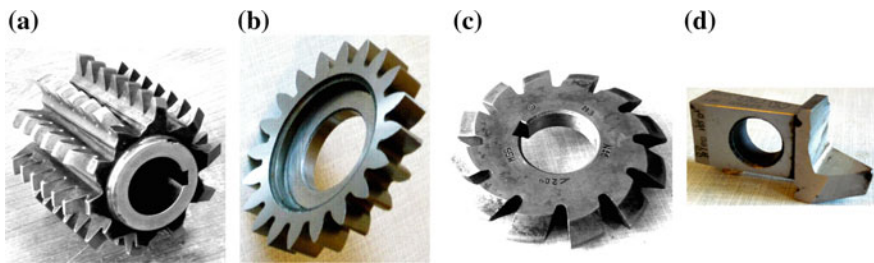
Edge-type tools for cutting gearwheels: a involute hob; b shaping cutter; c disk-type hob; d cutter of a cutting head for spiral bevel gear machining
